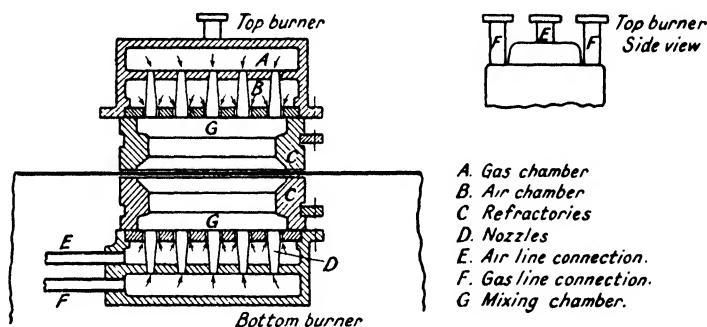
Diagrammatic representation of an autogeneous welding burner.
